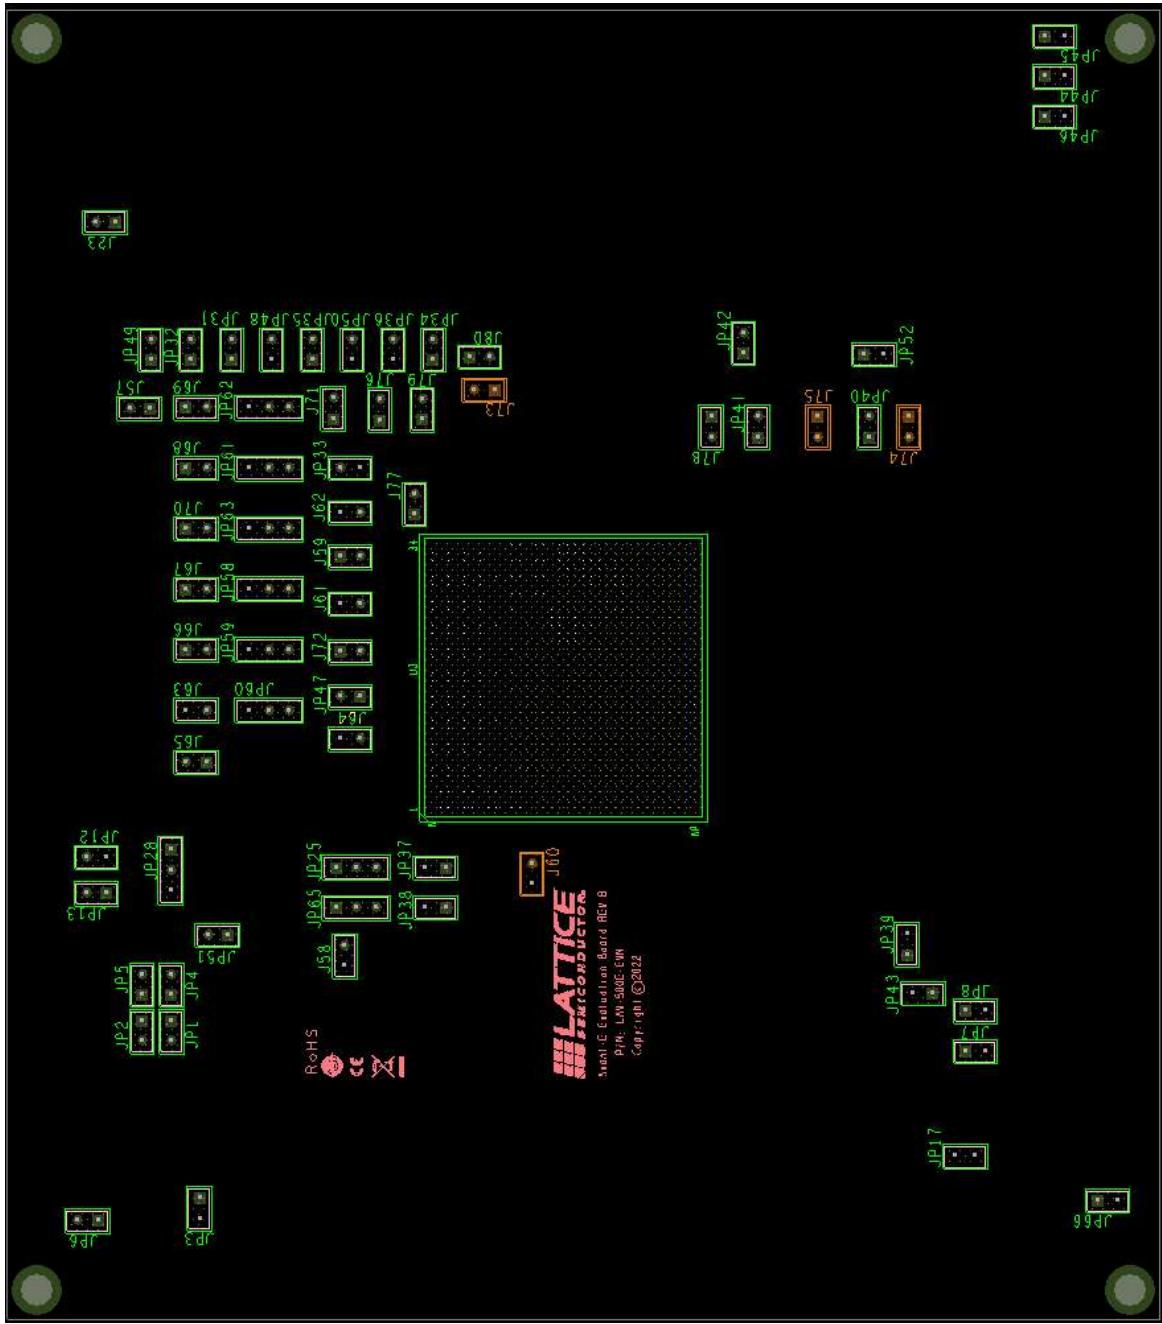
Top View of Avant Evaluation Board – Jumper Locations
